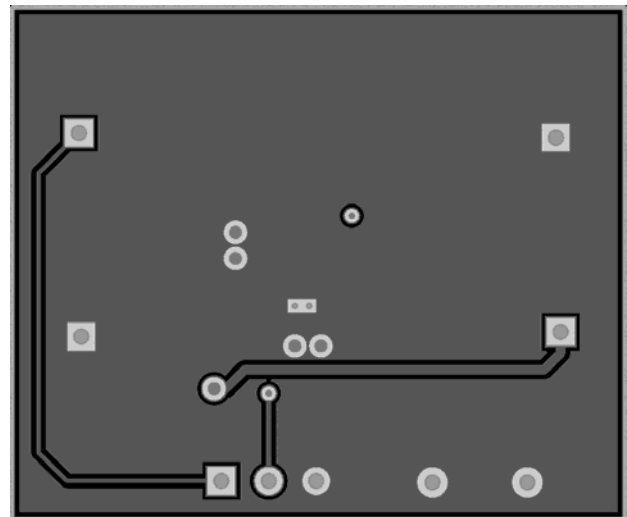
SKY87201-11 Evaluation Board Solder Side Layout
